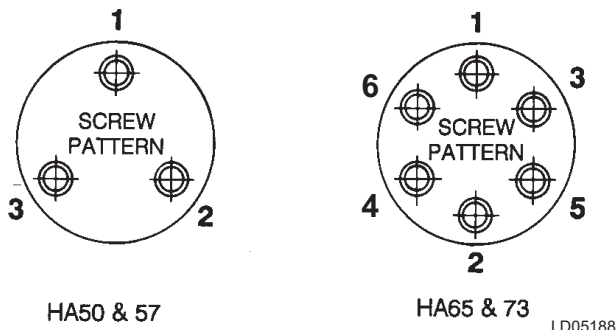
IMPELLER MOUNTING SCREWS TIGHTENING SEQUENCE
